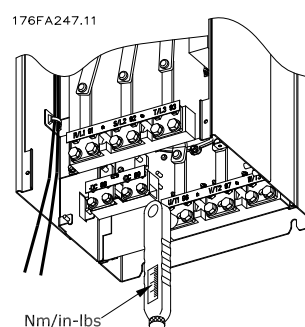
Always use a torque wrench to tighten the bolts.
